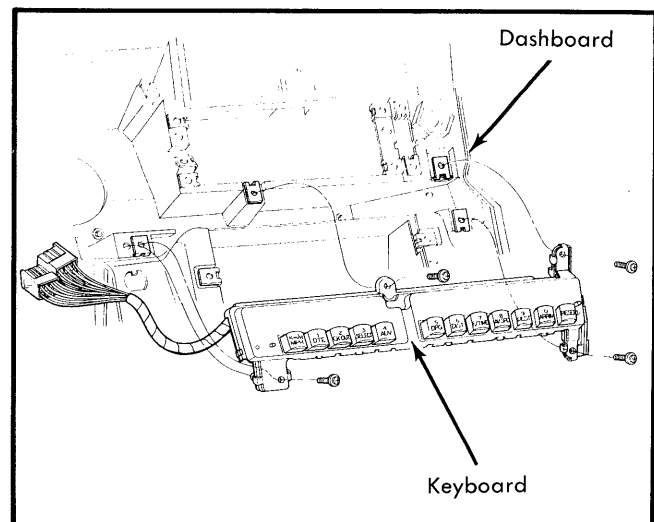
Message Center Keyboard Mounting (All Models Exc. Continental)
